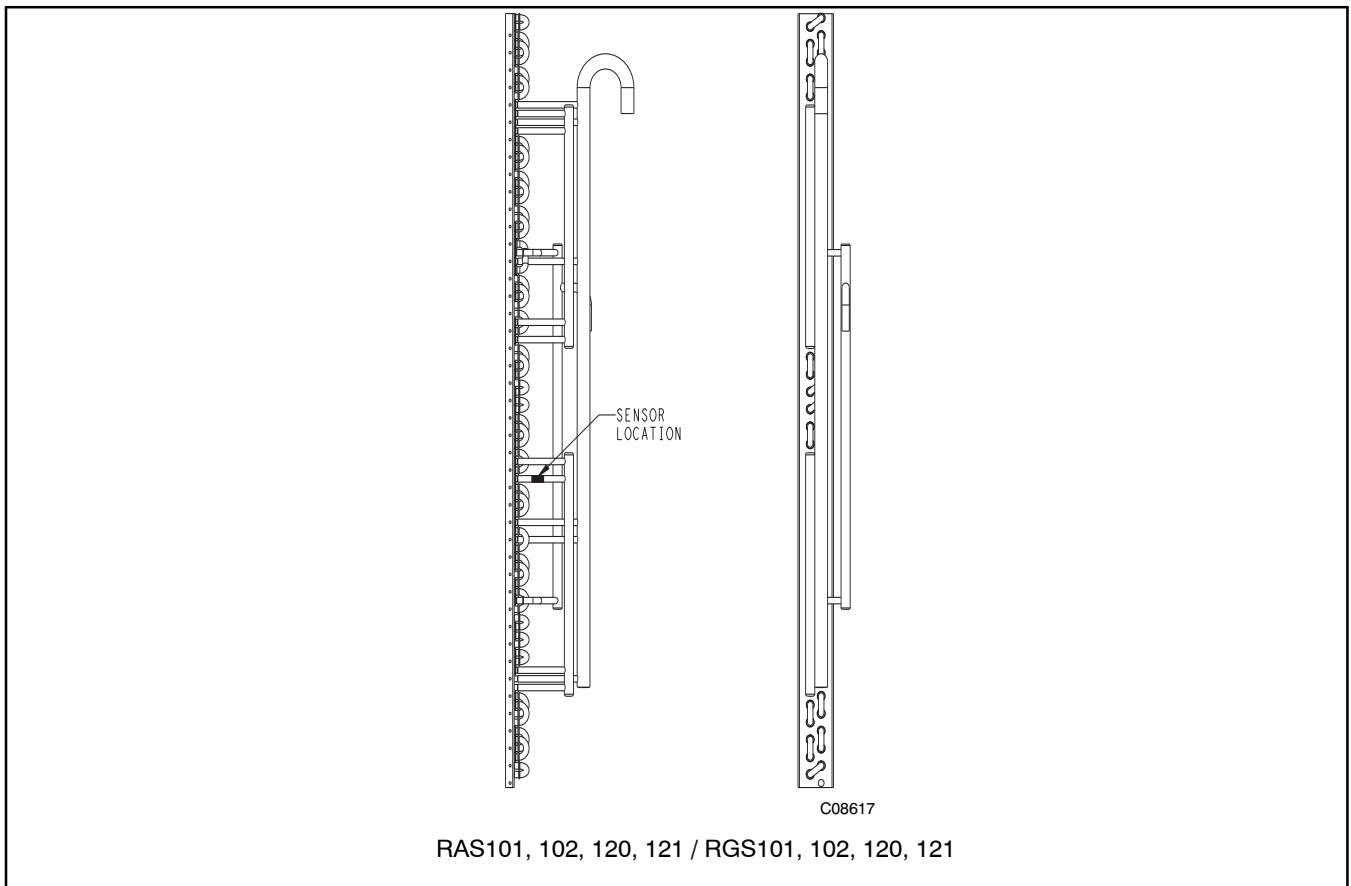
Motormaster® II Sensor Locations – 8-1/2 and 10 Ton Cooling Units
